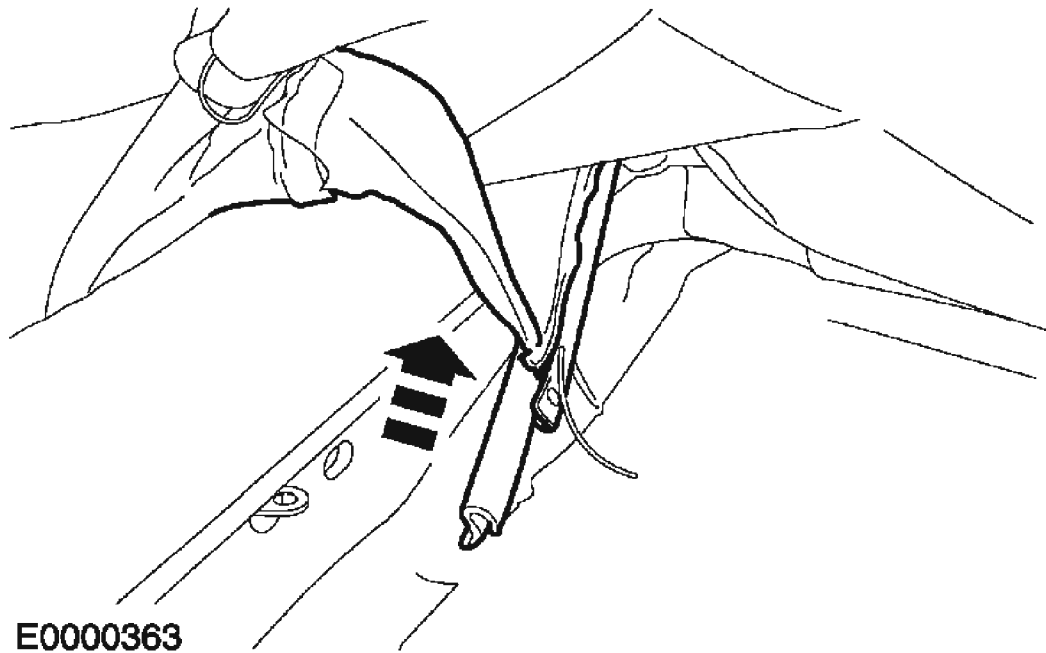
Attaching Side Air Bag Module Deployment Chute J-Clips
